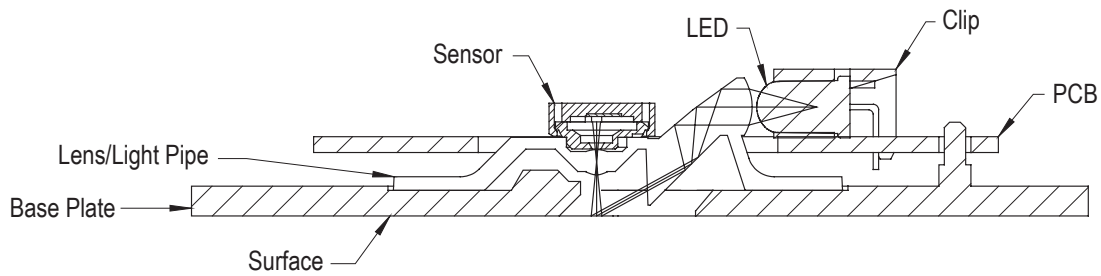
Sectional view of PCB assembly highlighting all optical mouse components (optical mouse sensor, clip, lens, LED, PCB, and base plate).
